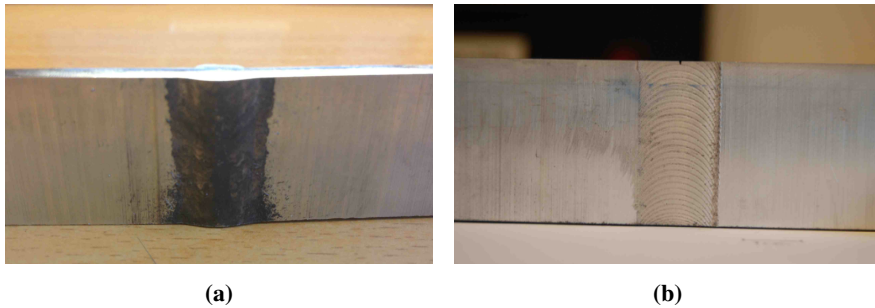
Specimens cut from the sheets being used for hardness testing: (a) GMA welded sheets and (b) FS welded sheets.
